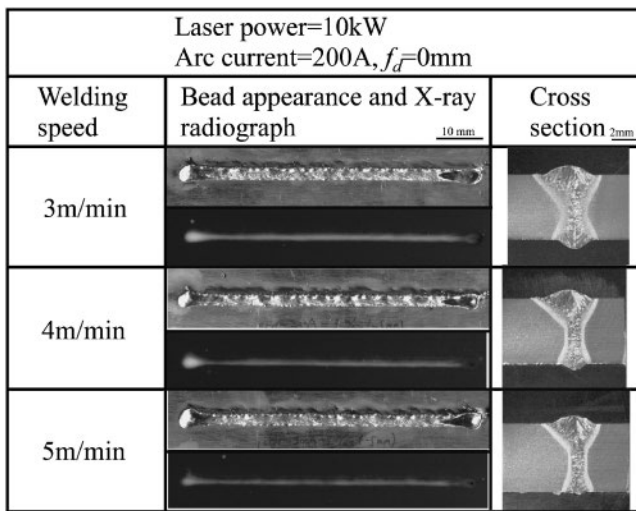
Bead appearances, X-ray radiographs and cross sections of fully-penetrated welded joints of 5 mm thick Ti-6Al-4V titanium alloy by hybrid welding with different welding speeds.
